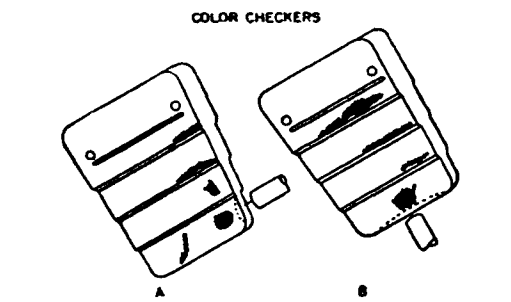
RESTRICTED GATING DIRECTLY INTO THIN SECTION CAUSED WELD LINES AND SMEAR MARKS.
